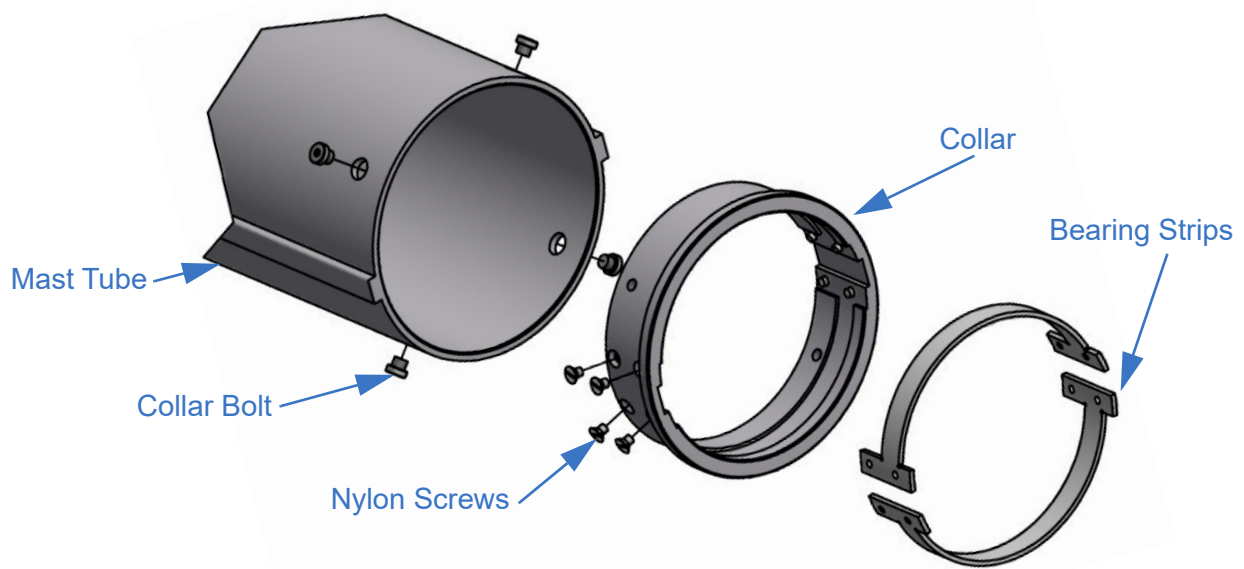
Bearing Strip and Keyway (P/N: 5099108 Shown)
